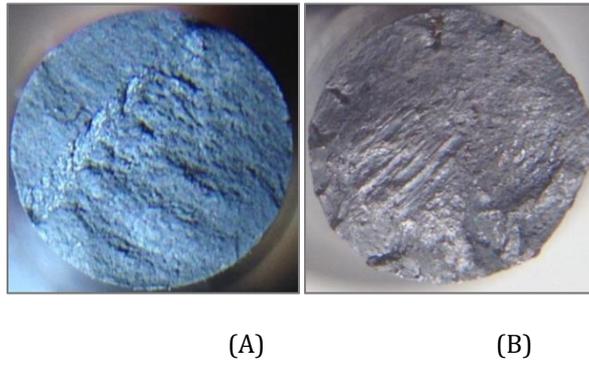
(L690M) steel A-Surface fracture for (Reversed bending) fatigue, B-Surface fracture for (bending with torsion) fatigue
